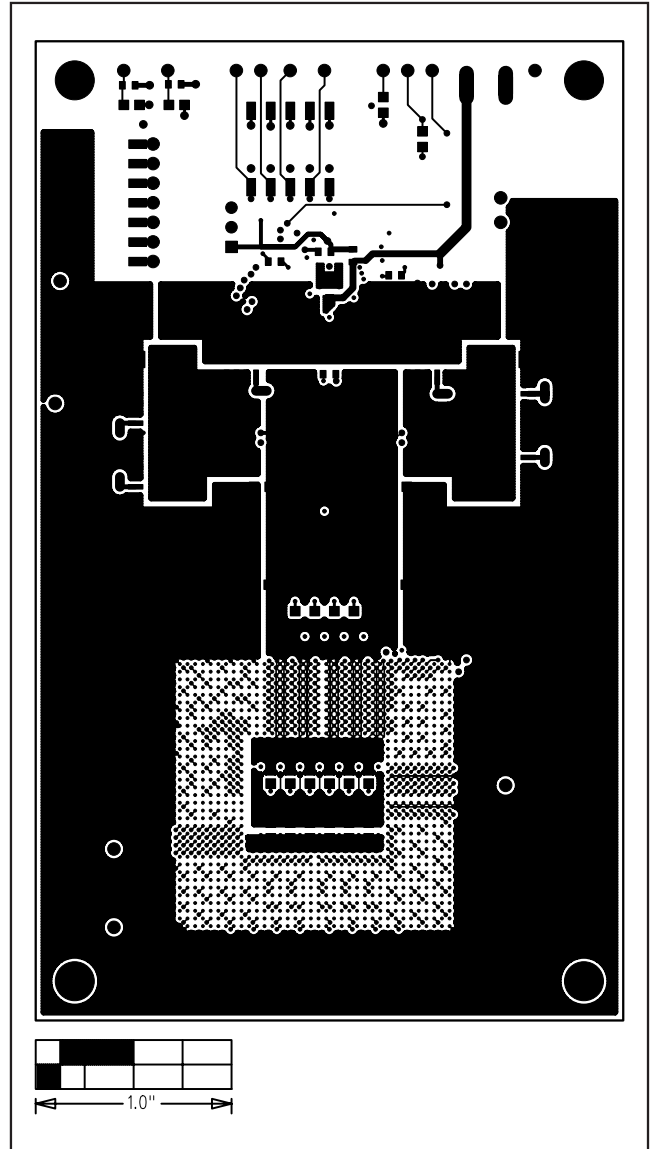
MAX17082 EV Kit PCB Layout—Component Side
